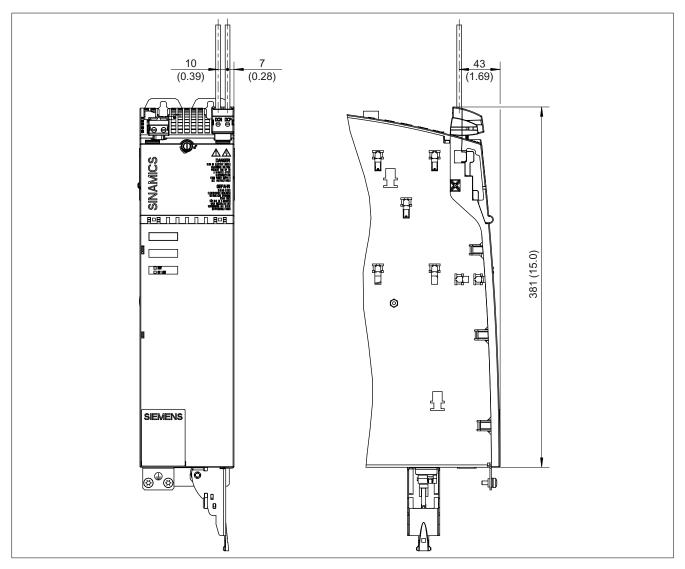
Dimension drawing of 100 mm component with DC link rectifier adapter for 0.5 mm² to 10 mm², all dimensions in mm and (inches)
